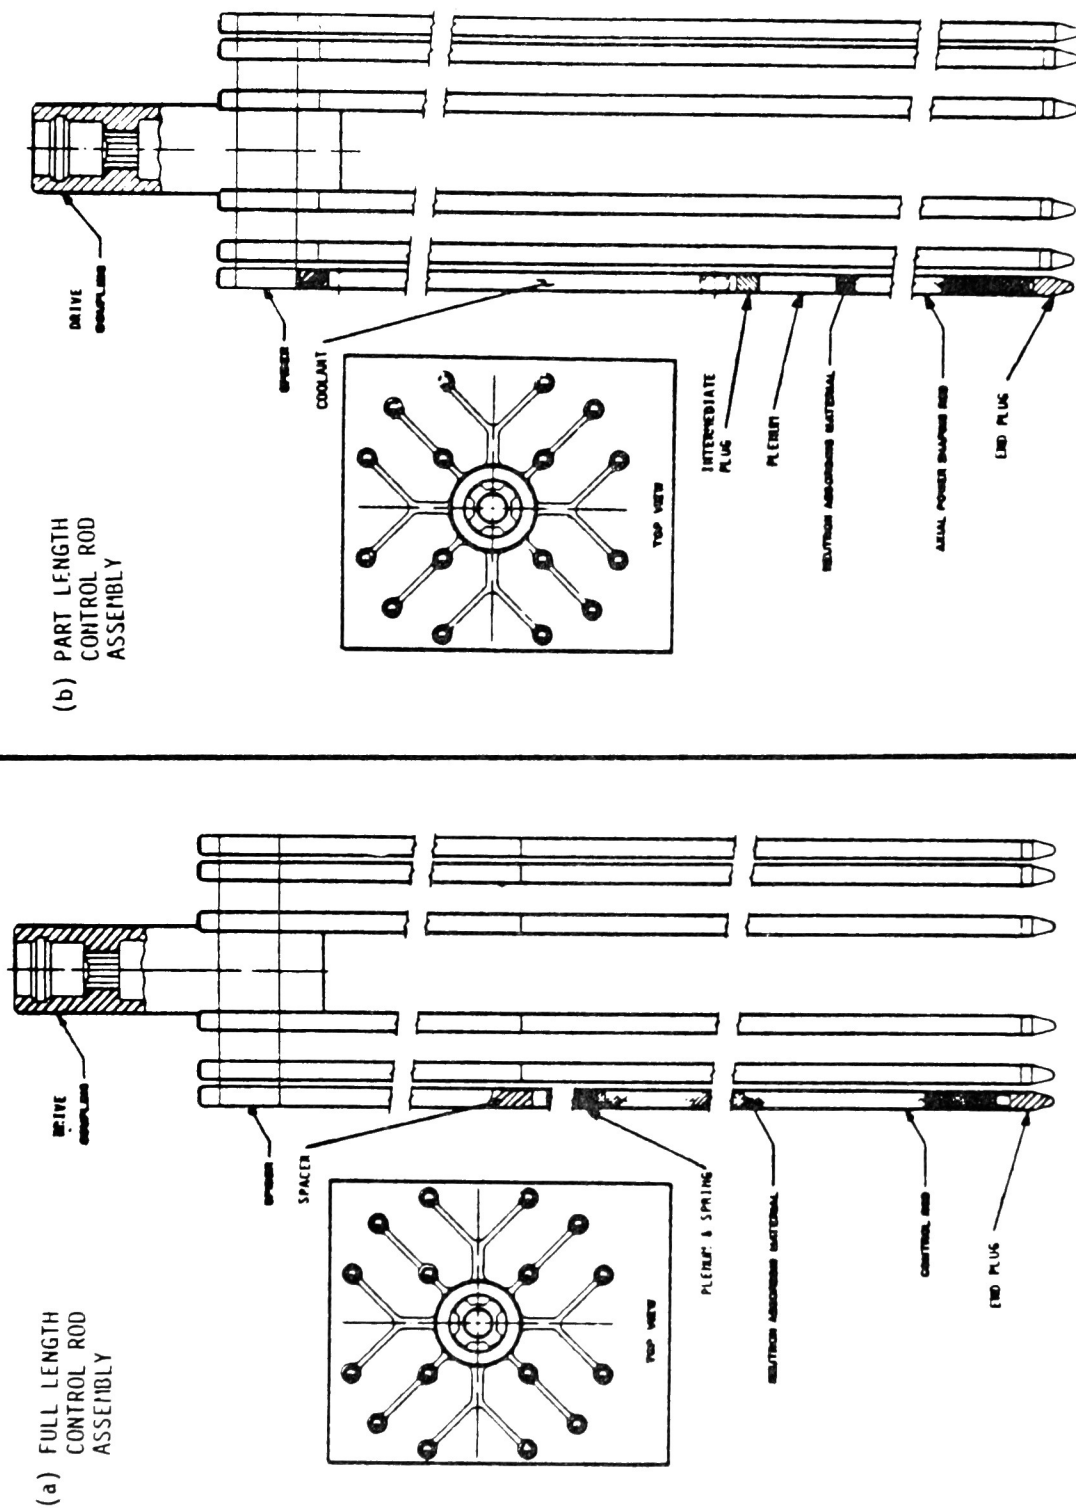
Side, Top, and Cross-Sectional Views of Movable TMI-2 Full and Part Length Control Rod Assemblies
